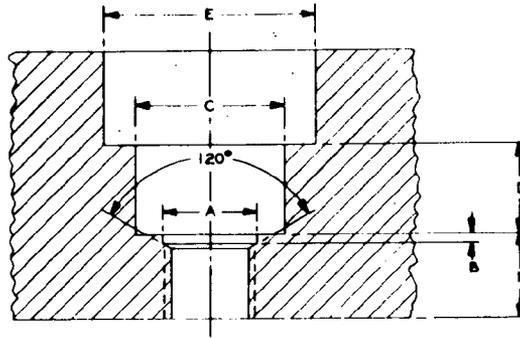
HEAD COUNTERBORE—FLAT SEAT (SEE TABLE 2)
